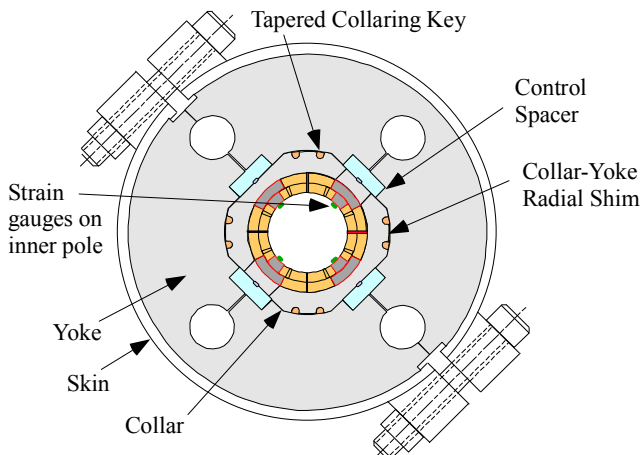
TQC assembly with quadrupole-style collars as in TQC02Ea.
